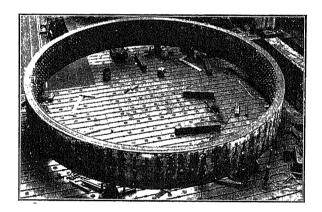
Assembled Rotor Run for 40,000 Kv-a. Conowingo Generator
